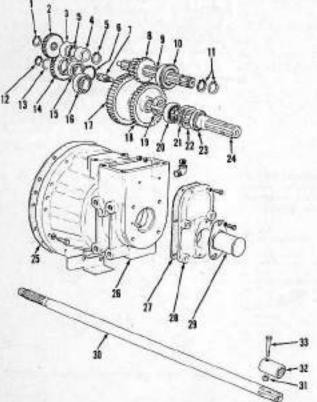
Exploded view of multi-speed pto housing assembly showing component parts and their relative positions.
